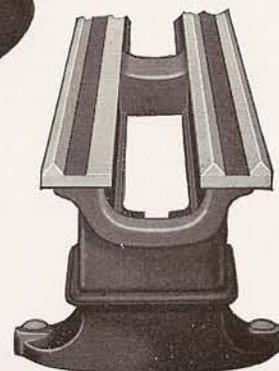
A. End View of 9-inch "Workshop" Lathe Bed.
